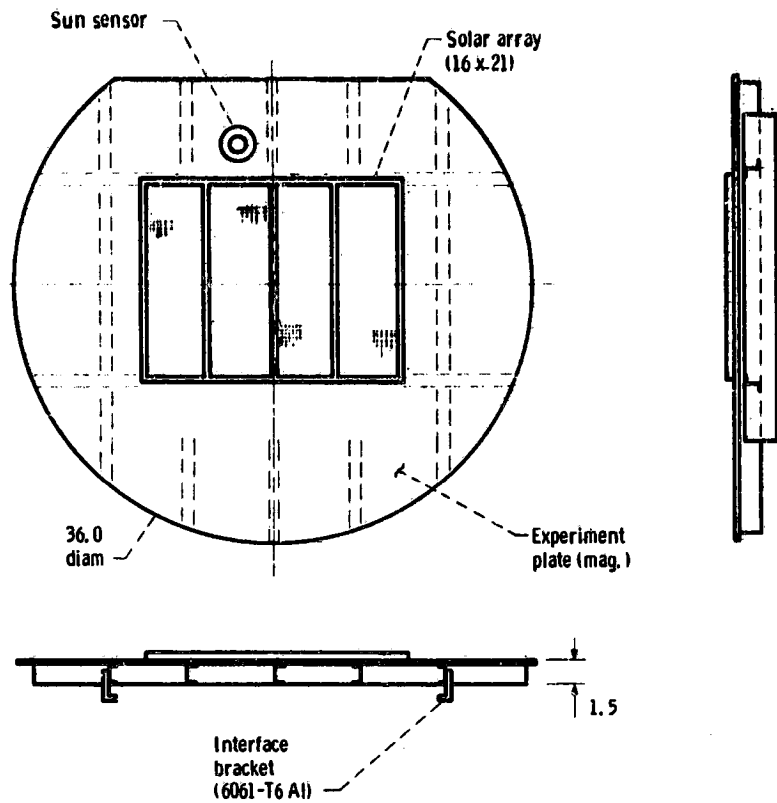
Experiment plate assembly. (Dimensions are in inches.)
